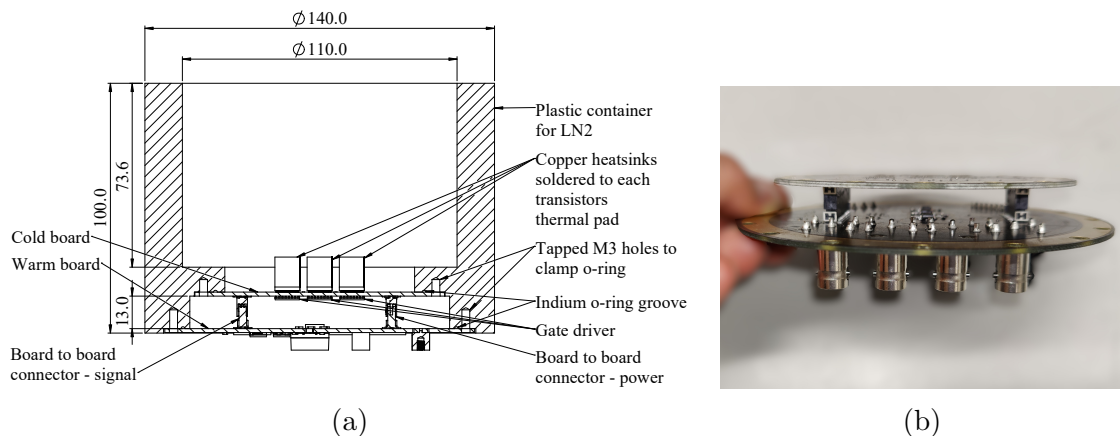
Drawings and photo of the original inverter PCB stack-up. The unreliable board-to-board connectors can be seen. (a) Drawing showing a section view, (b) photo of the original inverter PCBs and board-to-board connectors.
